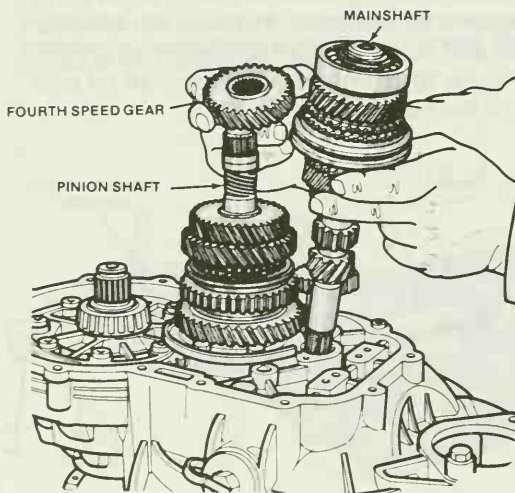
Removing the mainshaft assembly. (Chrysler Corporation)
